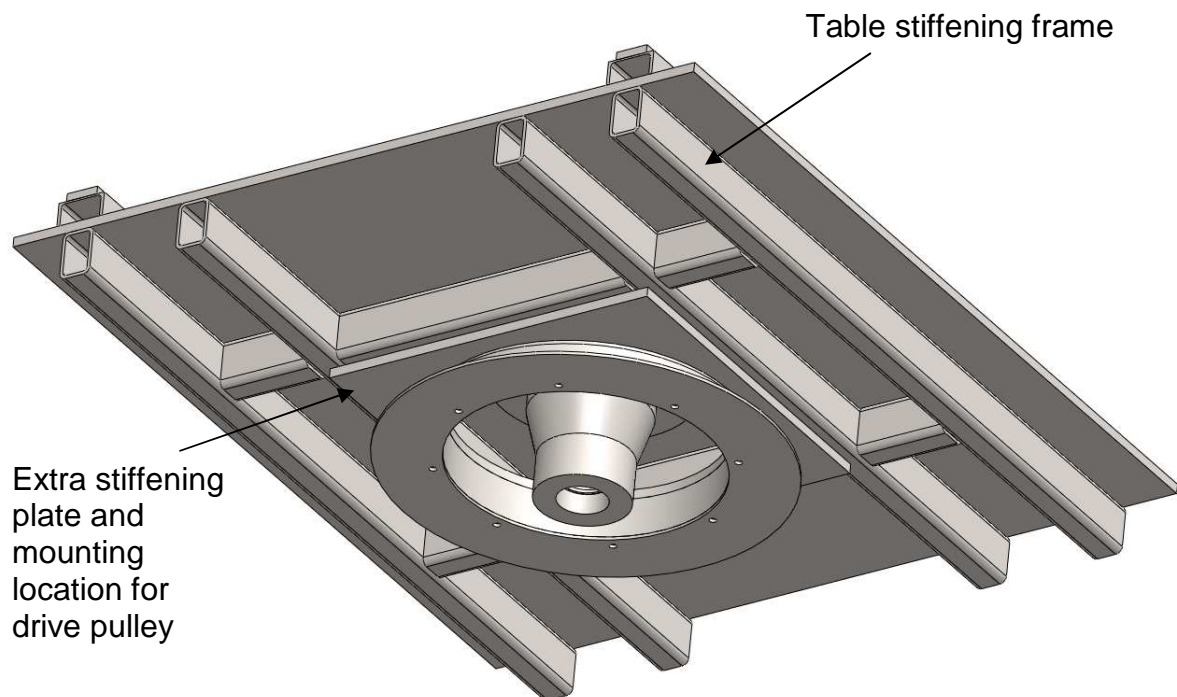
Bearing support table viewed from beneath showing the RHS frame and bearing trunnion
